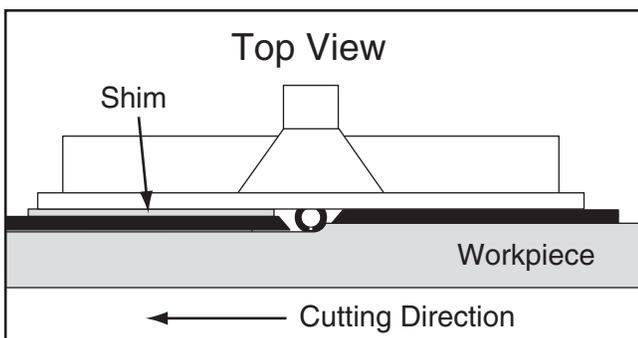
Fence setup for edge jointing (guard removed for clarity).
